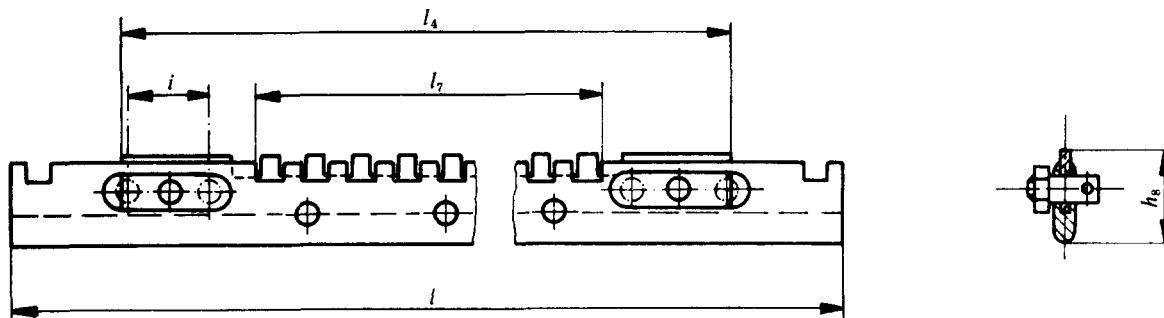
Combination FIG. 3 — Assemblage Фиг. 3 — Сборка
